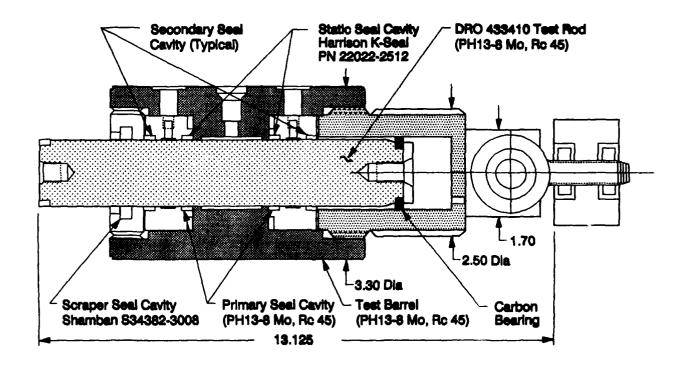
CROSS SECTION VIEW OF ROD SEAL TEST MODULE
